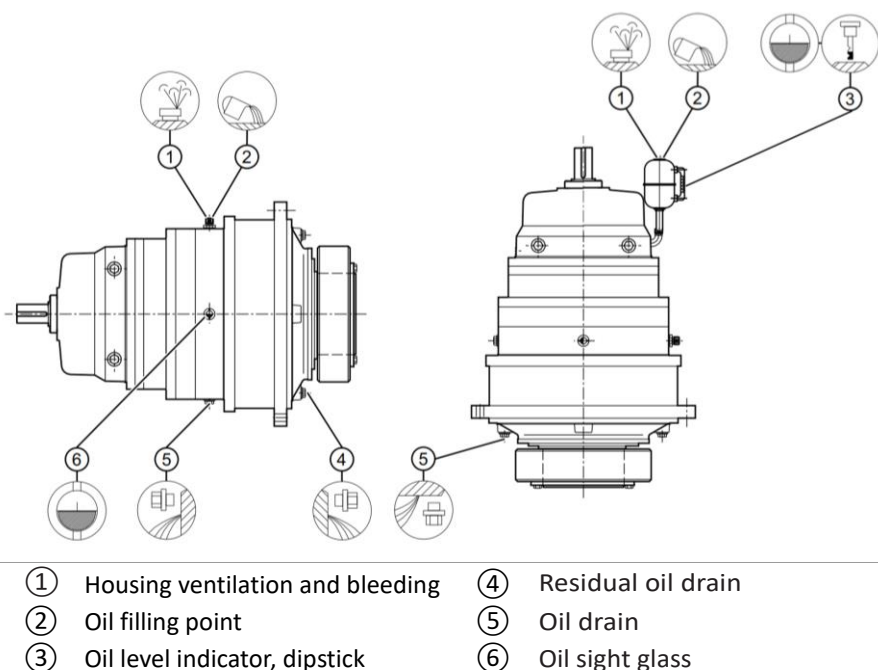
Oil filling locations and oil drain locations for the standard gear unit
